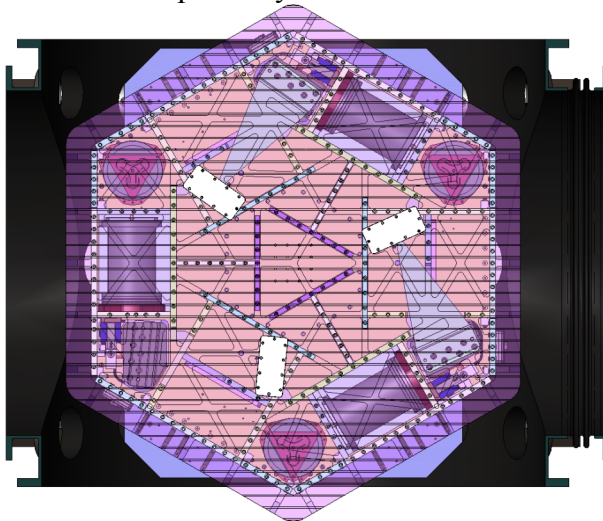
Top view of the table in a HAM. Five of the six seismometer cans can come directly out through the main doors. However, to remove the horizontal seismometer on the left side of the drawing, it must be pulled sideways into the beam tube, and then either lifted over the table, or go out the through the beam tube via the removable bellows or endcap, if available.
